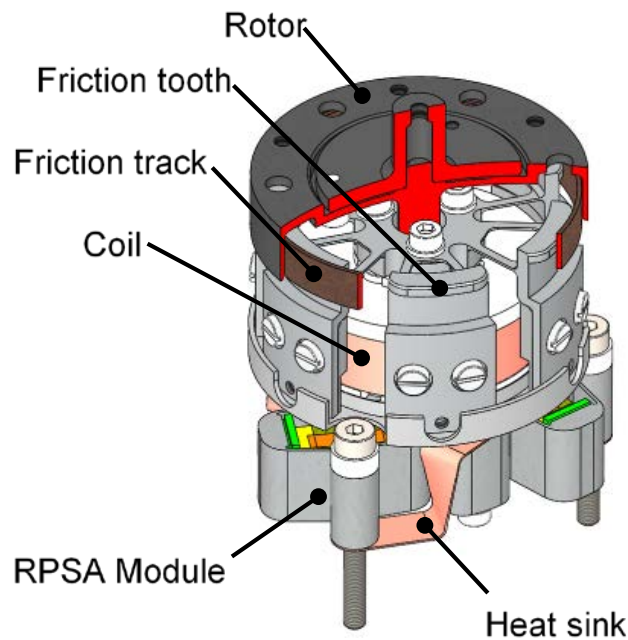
Partial Cut View Showing Rotor, Clutch and RSPA Module
